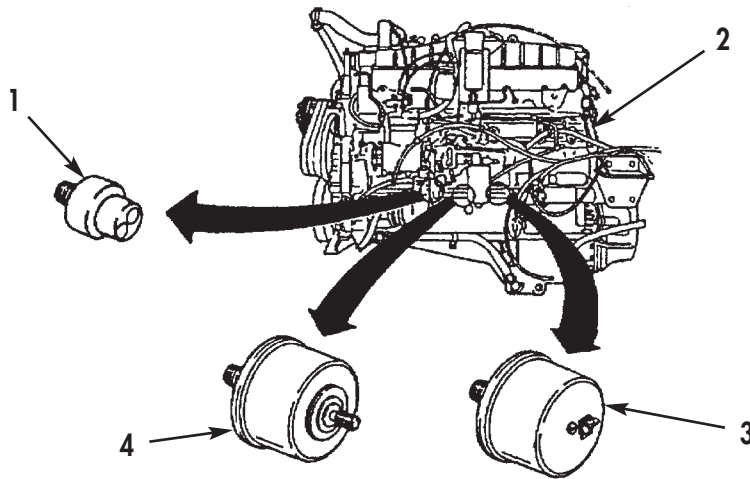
Oil Pressure Gauge Sensing Unit Removal.
